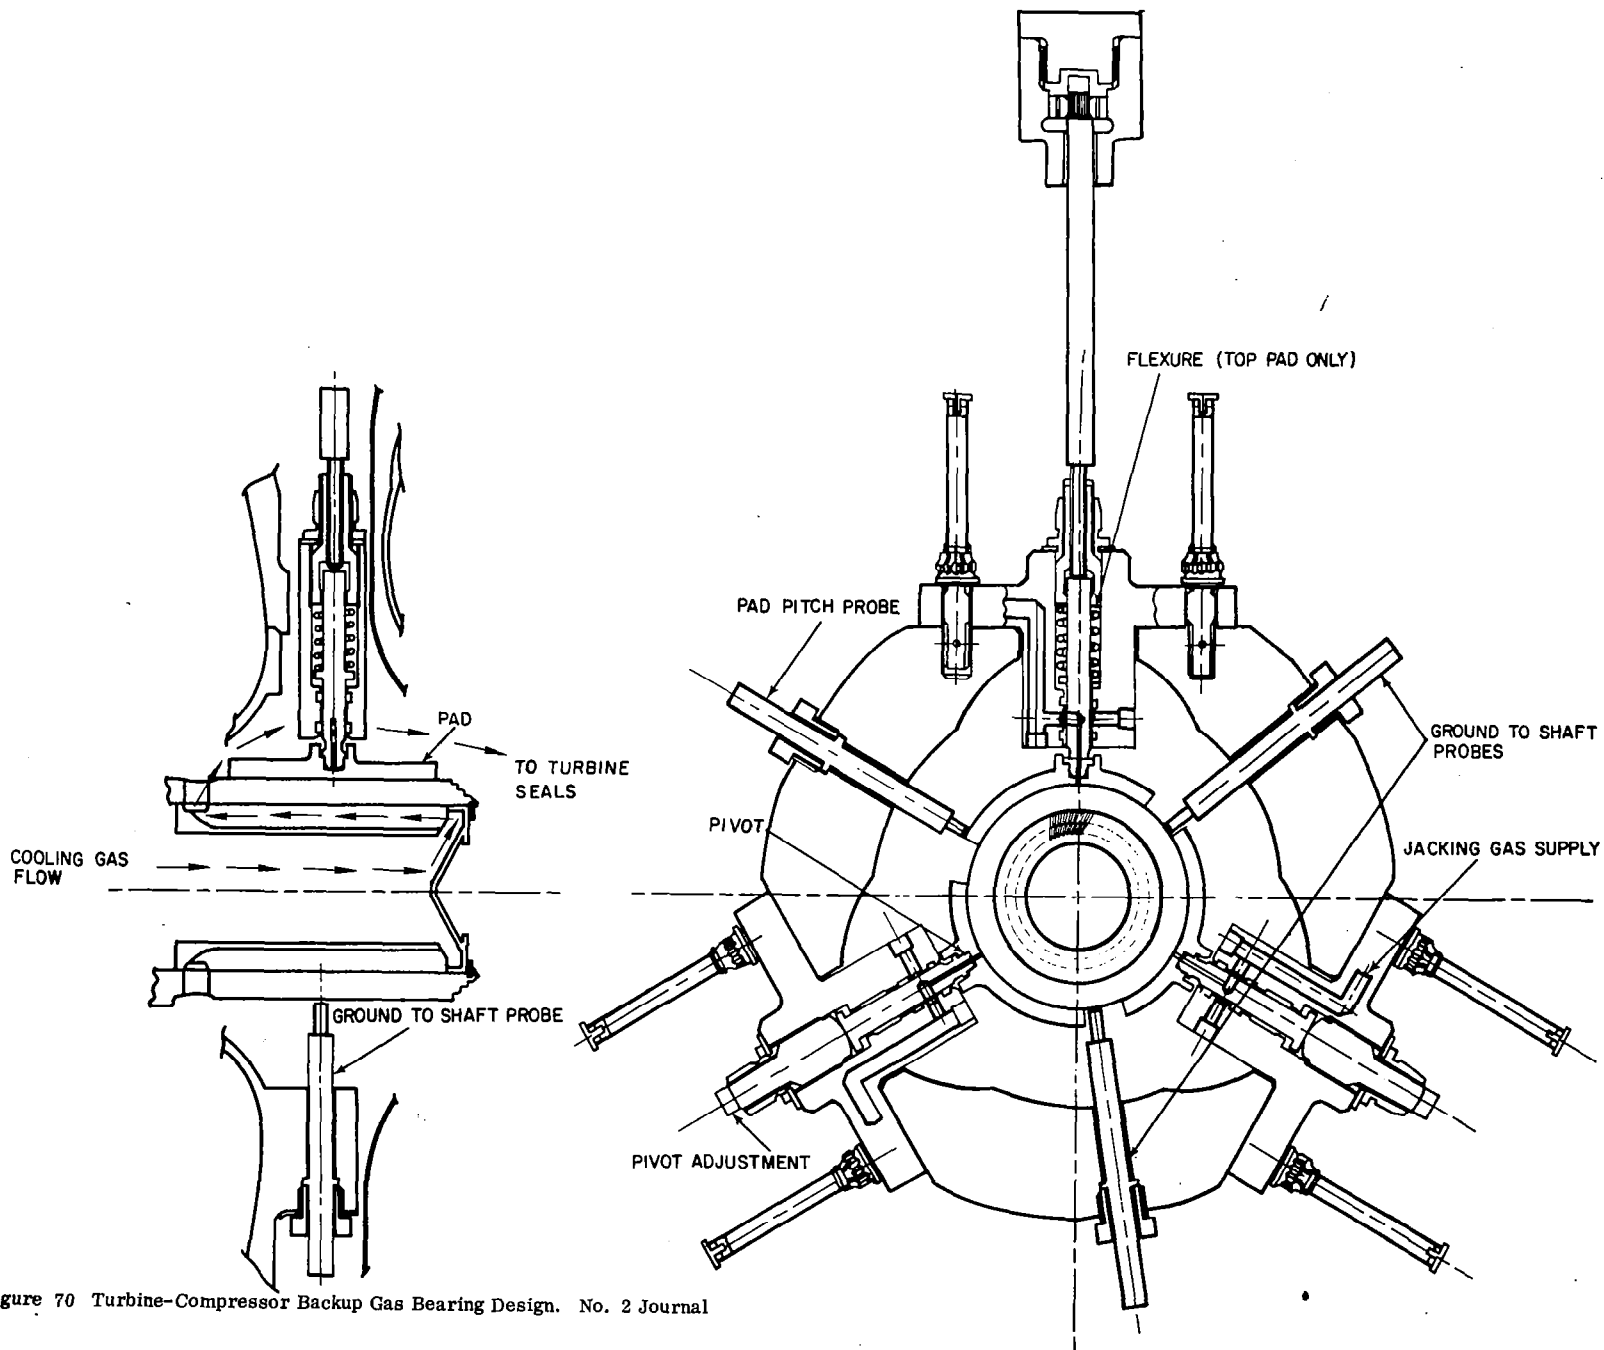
Turbine-Compressor Backup Gas Bearing Design. No. 2 Journal
